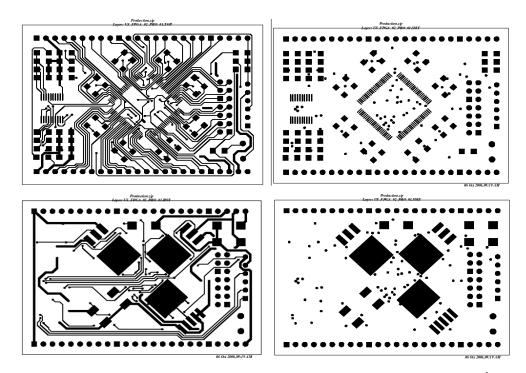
Top layer with the soldermask, bottom layer with the soldermask.  $5^{\rm th}$  generation coreboard manufacturing file set.
